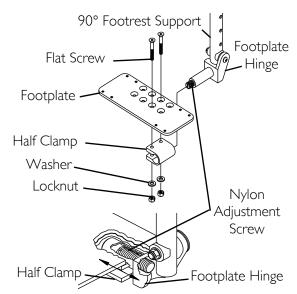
Installing Adjustable Angle Flip-up Footplates
